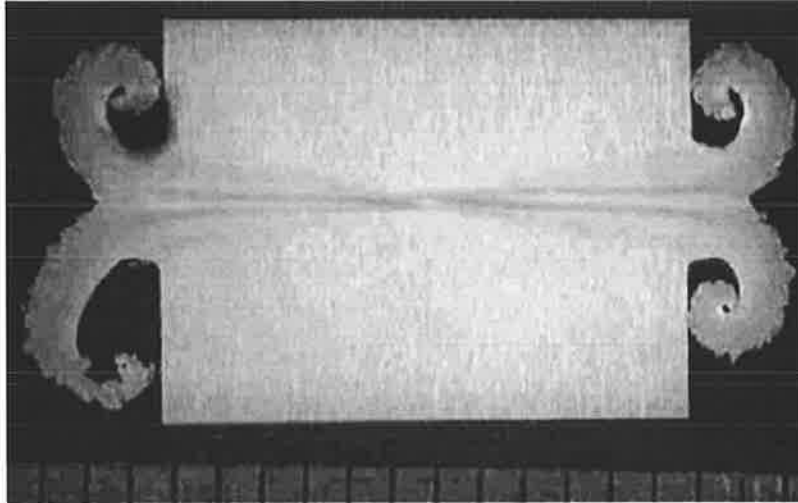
Macro photograph of a FW between fine grained ODS alloy and itself demonstrating the pinched or double cone profile in the weld zone [43].
